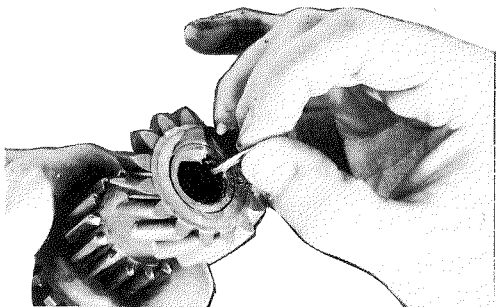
Next, reassemble the synchro units. Take special care that the springs and ball bearings don't fall out - i.e. push these inwards as the hub is pushed through the outer sleeve.
